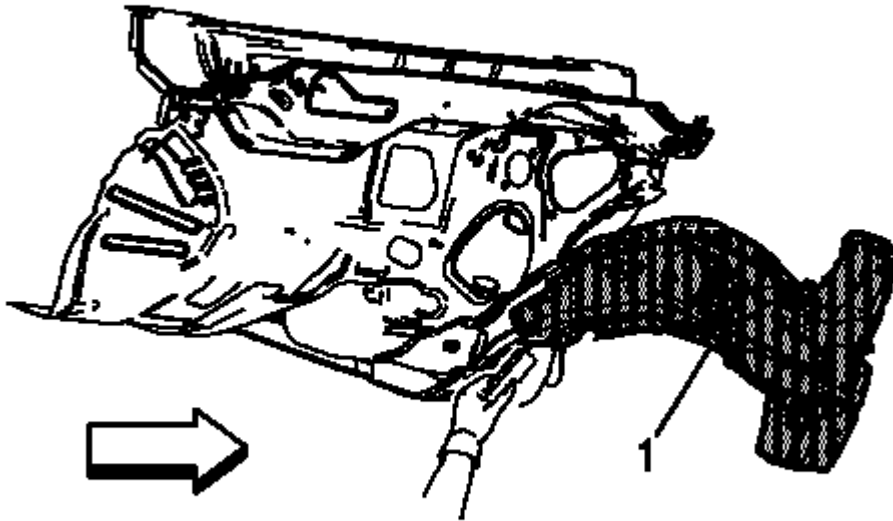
Welding Front Compartment Front Half Rail
